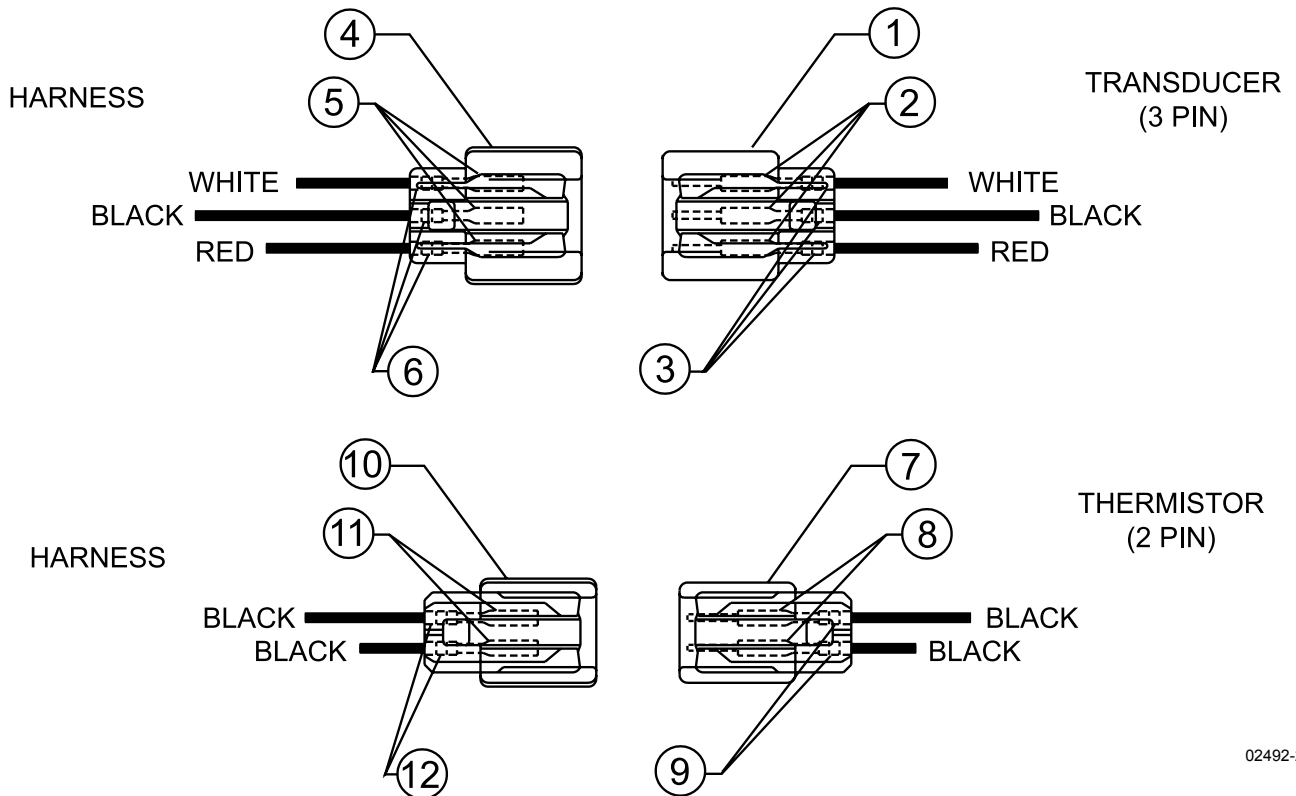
A – TRANSDUCERS AND HIGH PRESSURE CUT-OUT (REF. TABLE 13)
